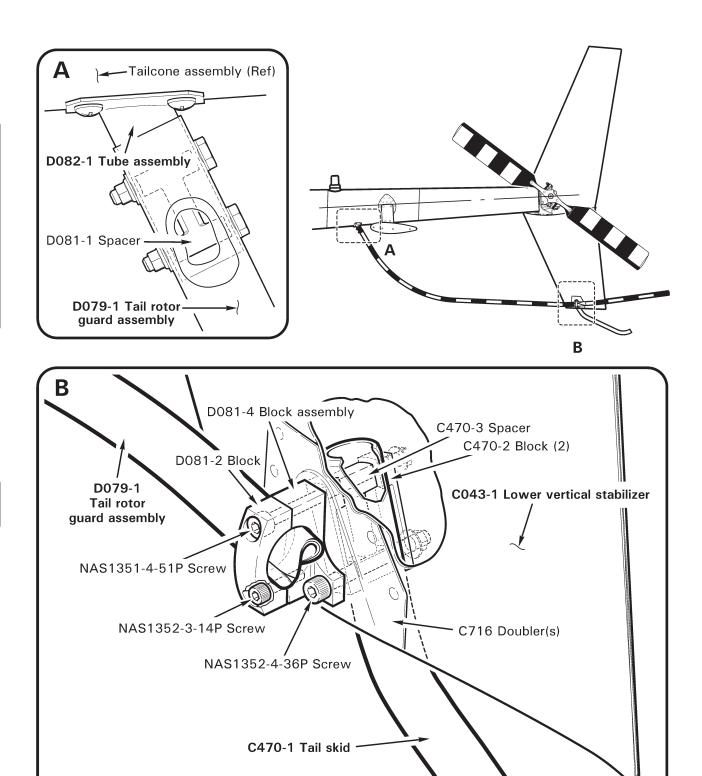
TAIL ROTOR GUARD ASSEMBLY (C050-2 float stabilizer assembly not shown)
